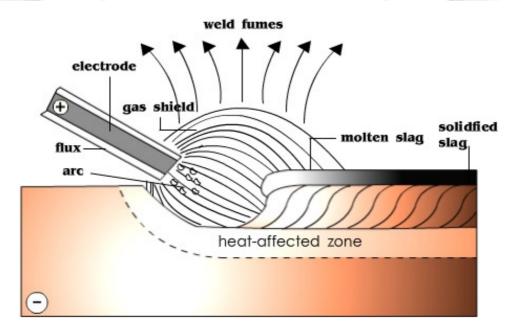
Schematic Illustration of Electric Arc Welding
